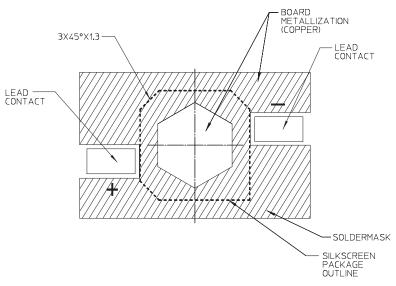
Solder Pad Layout 2-Lead Gullwing.
